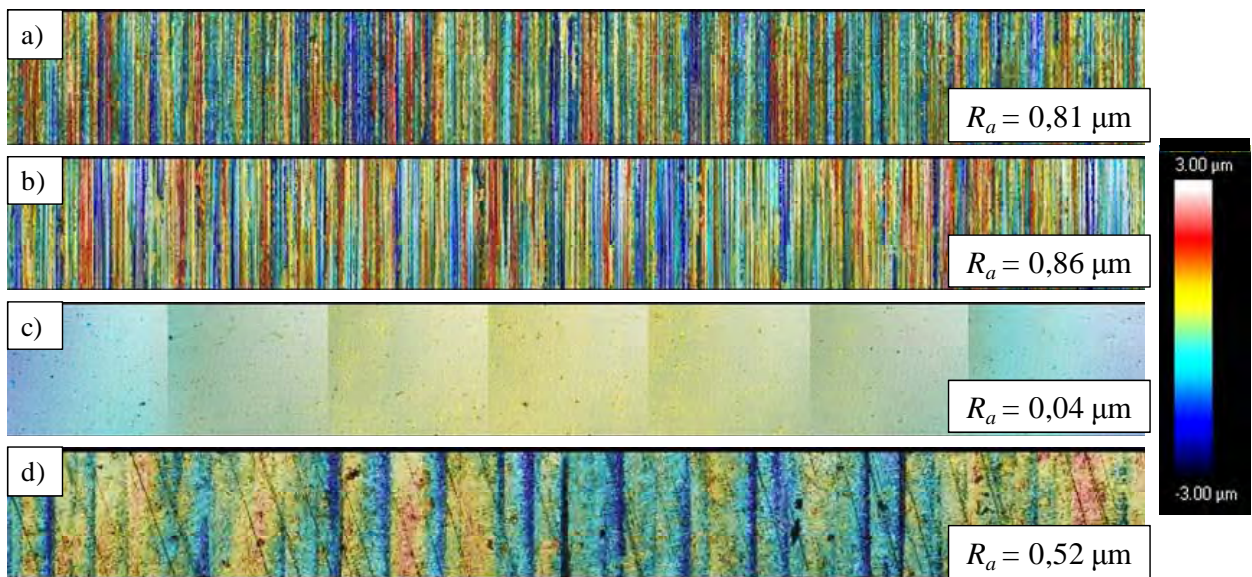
Topographic images obtained in CM of the flank face and R_a values of: a) 1.2379 tool; b) HWS tool; c) polished part of the new UNIVERSAL tool and d) as-grinded part of the new UNIVERSAL tool
